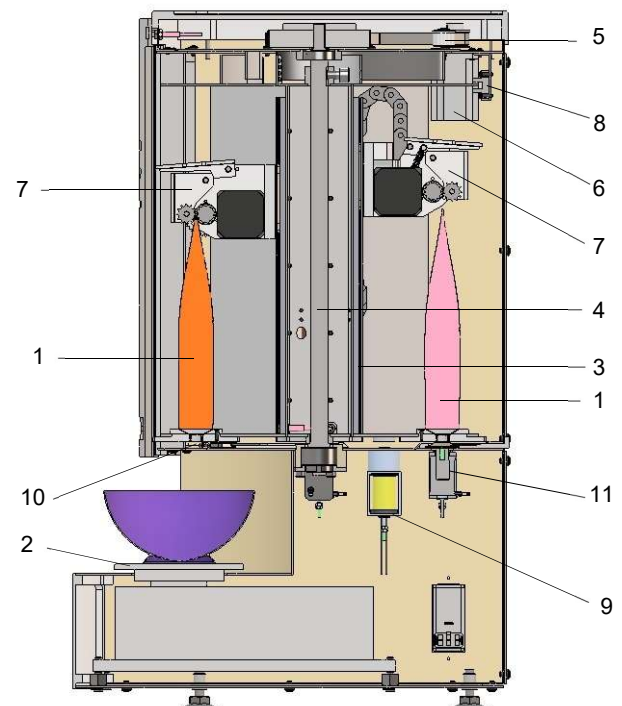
CAD 3D model of the dispenser (section): 1 - tube, 2 – weighing scales plate, 3 – cartridge, 4 – axis, 5 – synchronous transmission, 6 – stepper motor, 7 – squeezing module, 8 – optical sensor, 9 – electromagnetic lock, 10 – scraper, 11 – closing module
